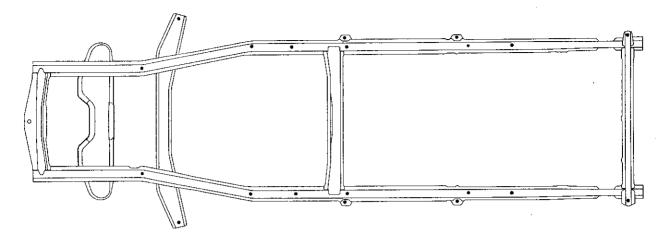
THE HEAVY DOTS (•) INDICATE BODY BOLT HOLES
